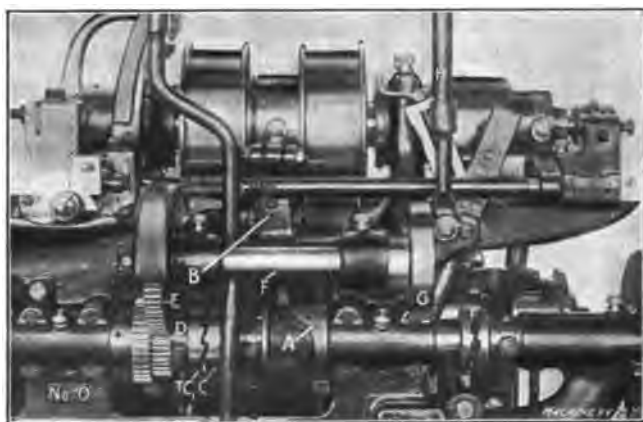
Rear View of No. 0 Brown & Sharpe Automatic Screw Machine showing Reversing Mechanism and Belt Shifting Attachment:
